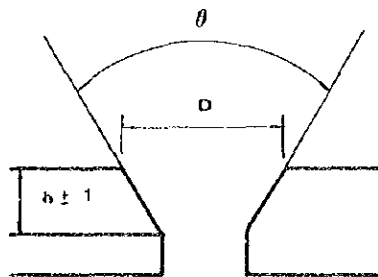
Shape of Counter-sunk Rivet and Counter-sunk Bolt
